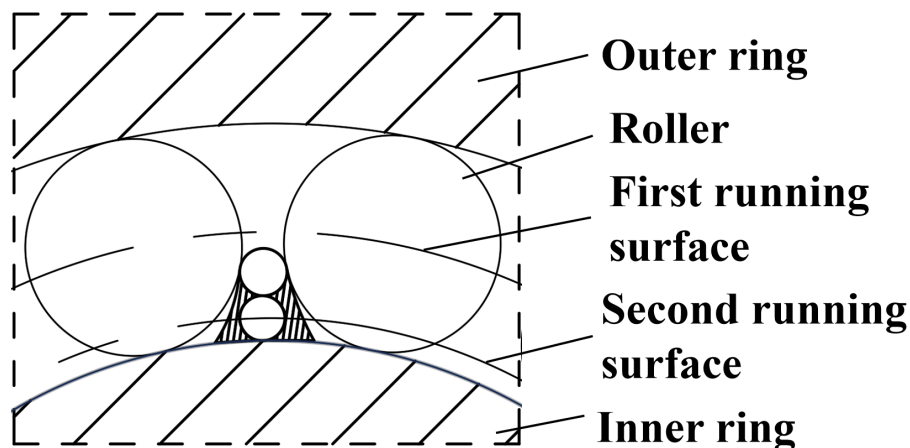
Bearings with reverse rotating bearings DE102015221210A1.
